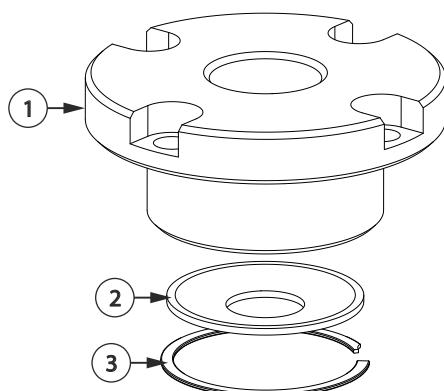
Removing the Heat Sink and Cap from Manifold Pocket
